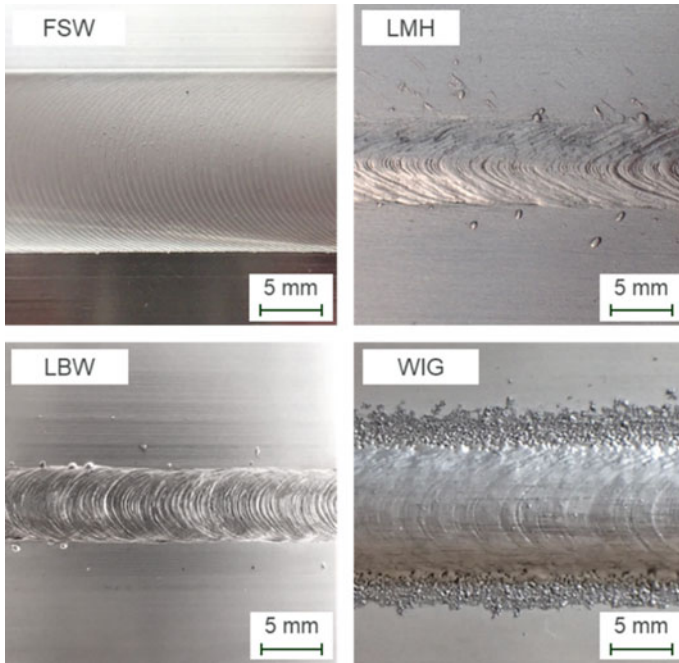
Appearance of the joint welded by a FSW, b LMH, c LBW and d MIG
